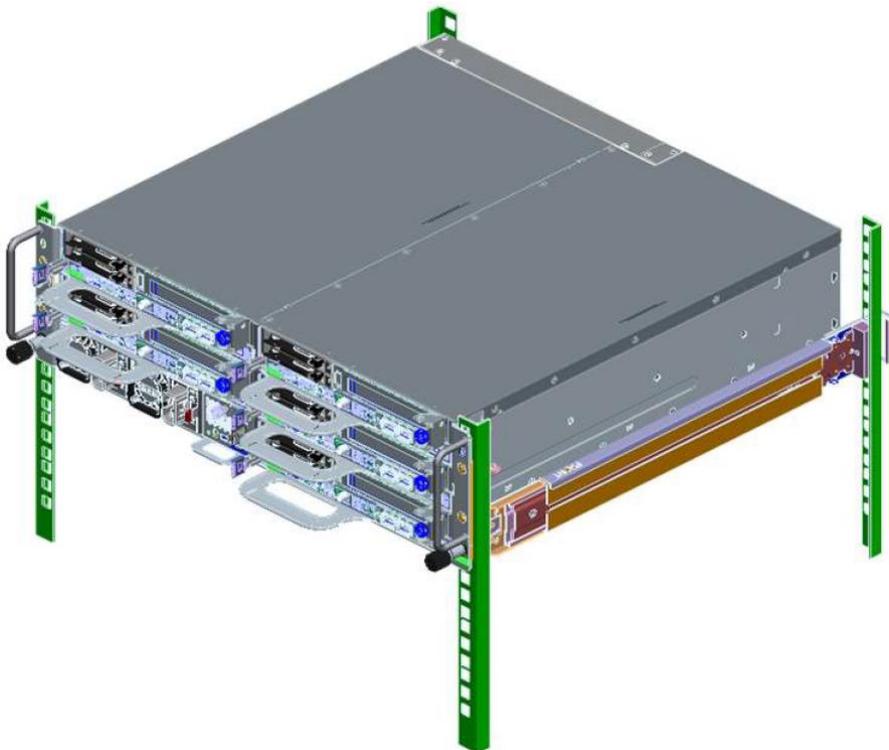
Open edge chassis installed in 19" rack frame using an adjustable shelf
